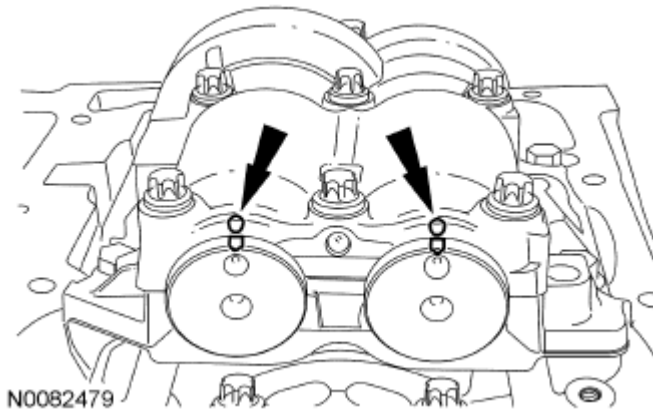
Locating Balancer Unit Shaft Marks At TDC Position
